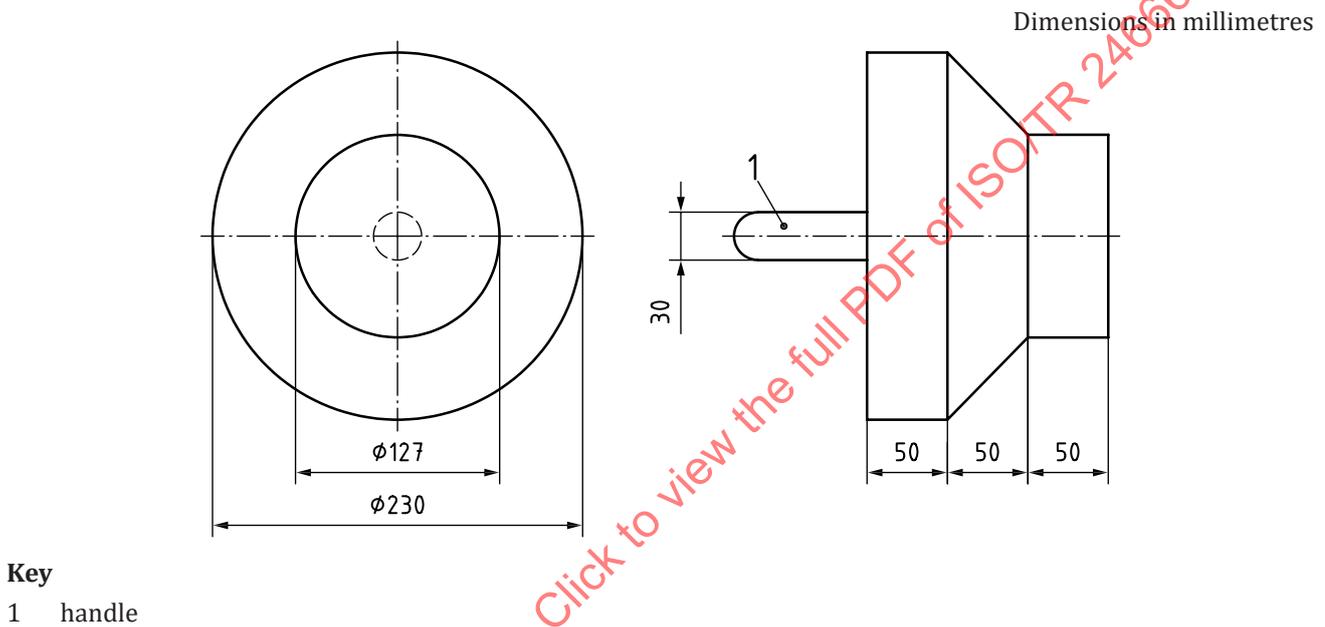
Large and small head probe with 230 mm and 130 mm diameters
